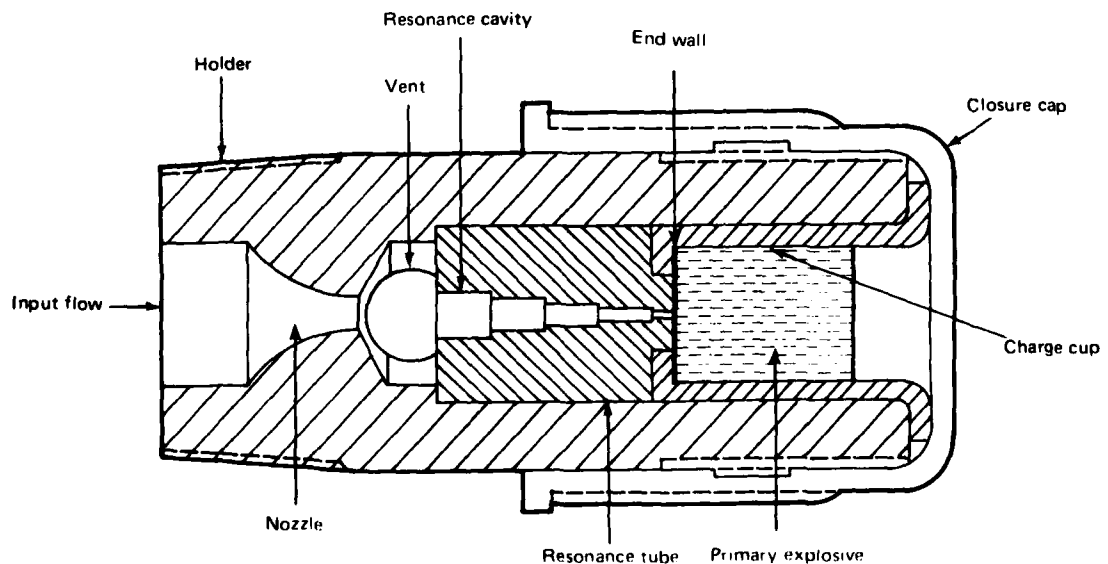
FLUERIC EXPLOSIVE INITIATOR ASSEMBLY
